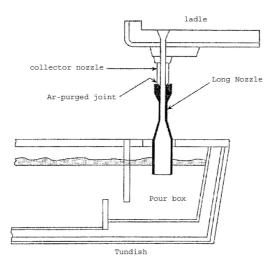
Tundish for casting clean steel with a long nozzle for minimum contamination by macro inclusions. [Ref. 5]
